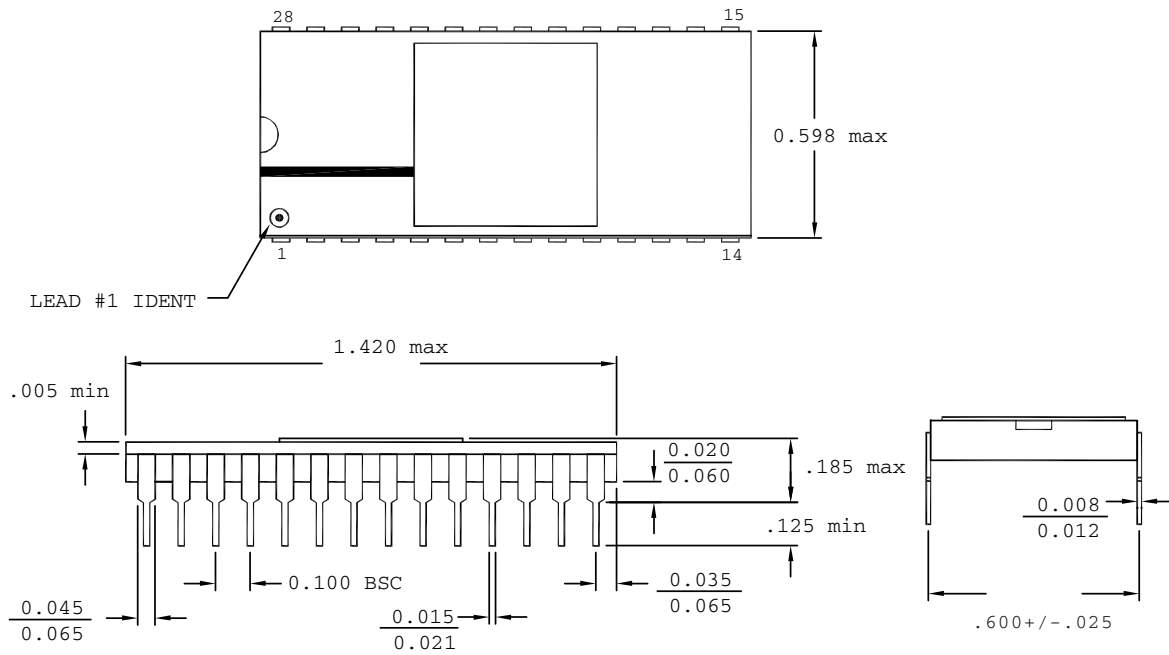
28-Lead Ceramic Sidebrazed Dual In-Line Package
